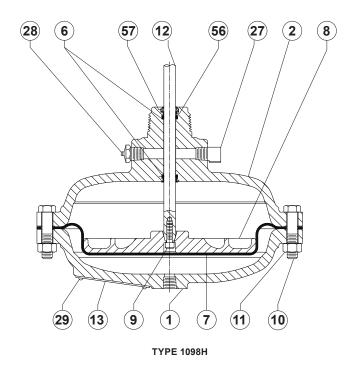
Types 1098 and 1098H Actuator Assemblies (continued)
